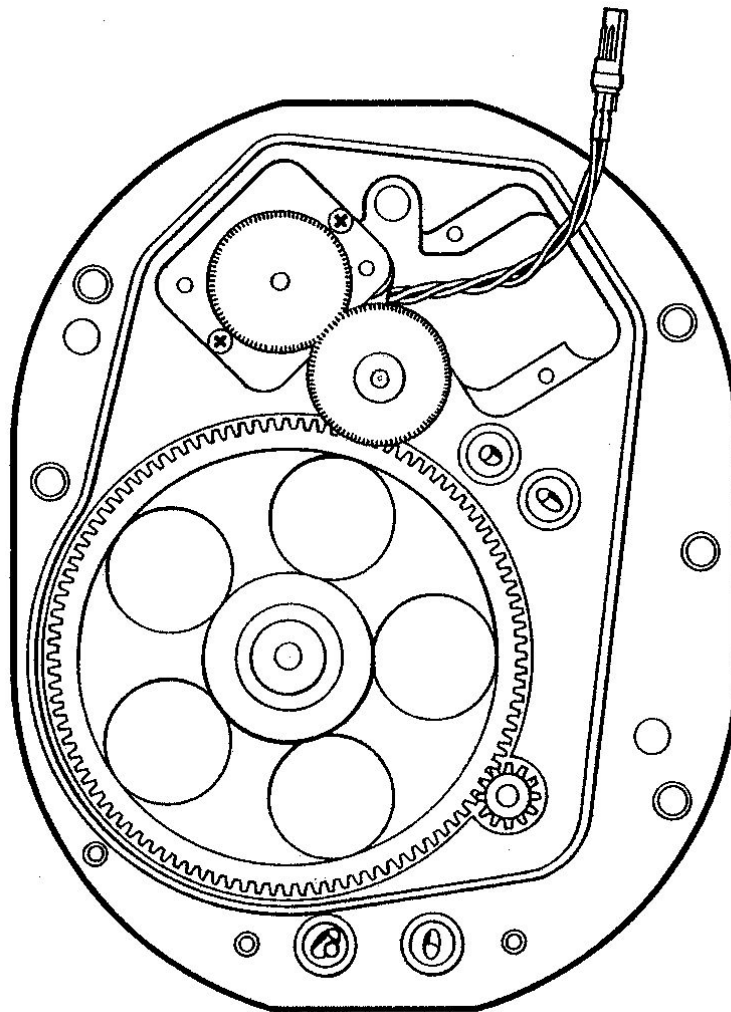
Rear view of wrist roll actuator with potentiometer and gears installed
